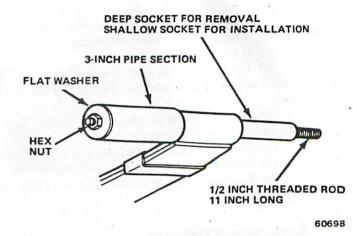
N-10 Bushing Replacement Tools-Large Bushing
